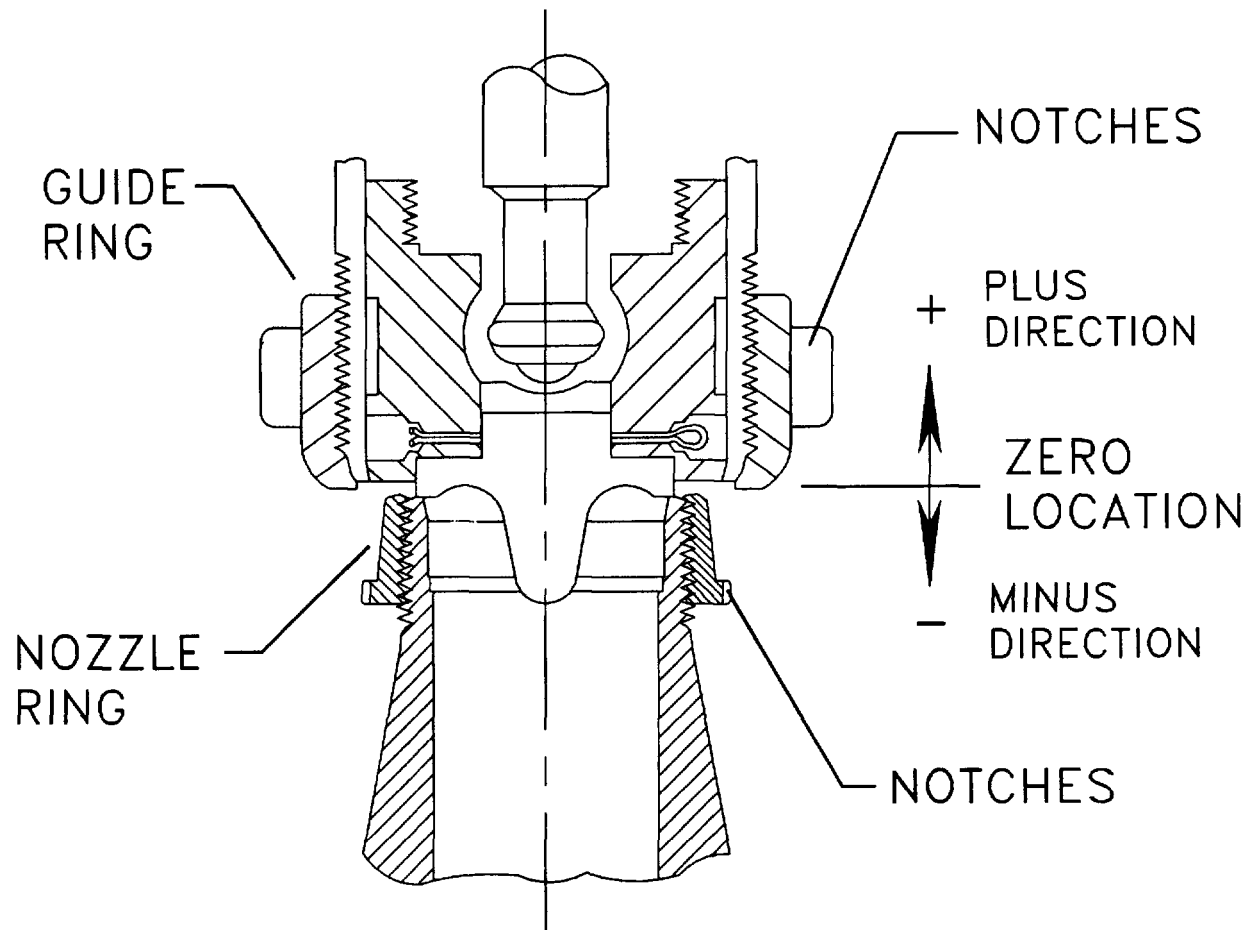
Nozzle and Guide Ring Adjustment
